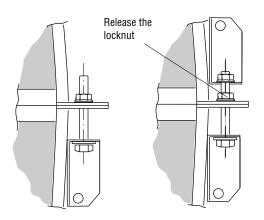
3. Before the clamping straps can be tightened, the locknut holding the lower half of the rotor must be released.
